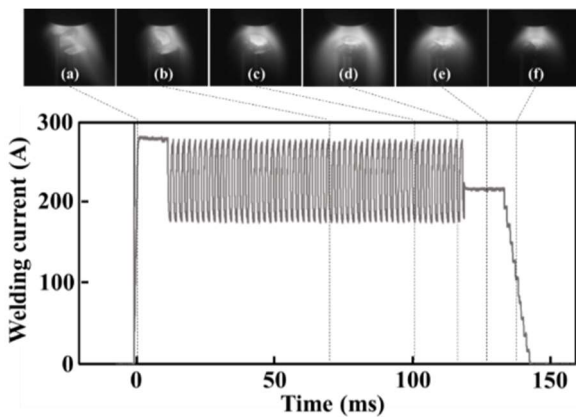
One cycle of rectangular copper wire melting by PJT welding process.
